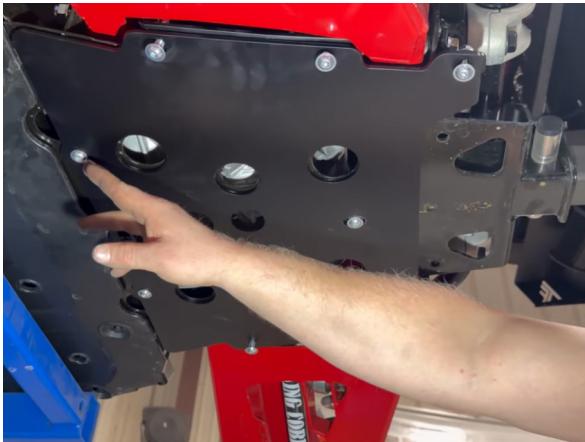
Loosley mount the front of the Base Plate to the vehicle
